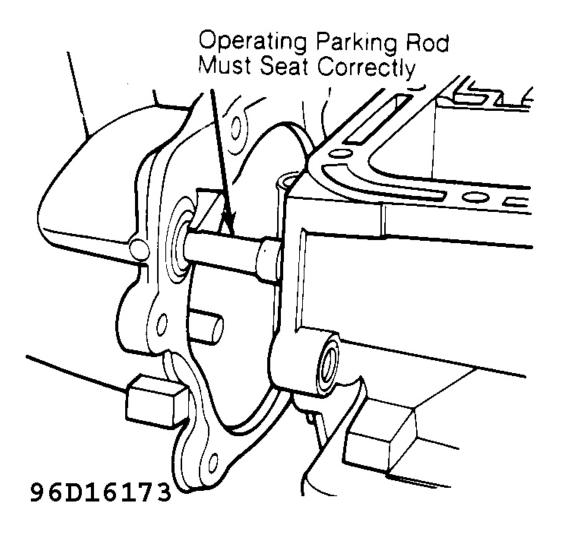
Rear of Transmission Housing Courtesy of FORD MOTOR CO.
